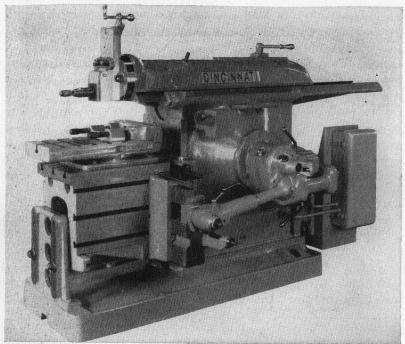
A standard crank shaper. (The Cincinnati Shaper Company)
